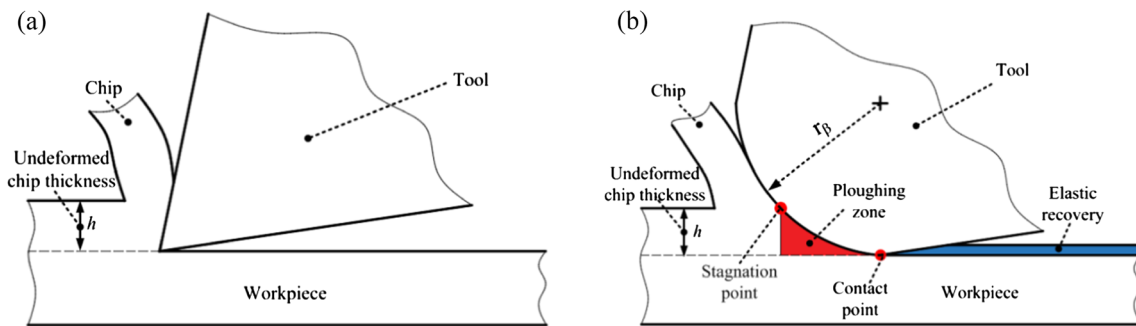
Characterization of tool contact with machined surface. a Sharp edge tool. b Honed edge tool
